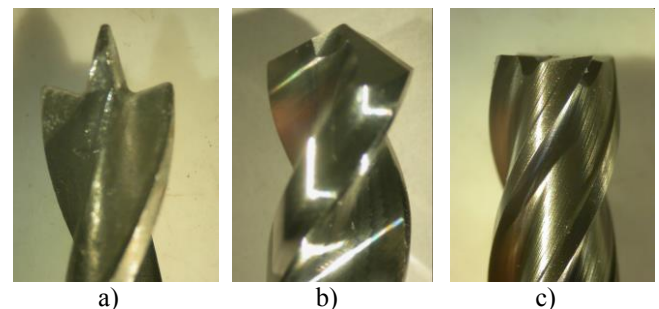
Wood drilling (a), twist (b) and milling (c) tool.
